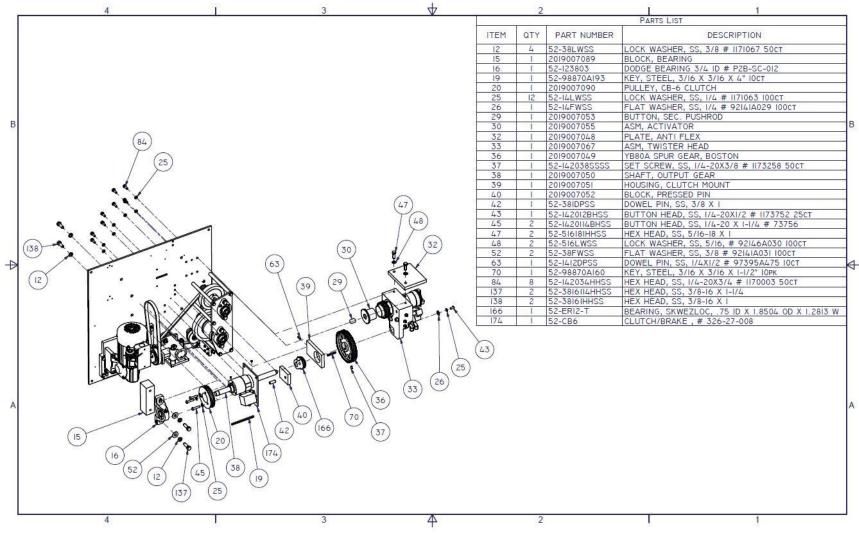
Drawing – Clutch/Twister Head Drive Assembly
